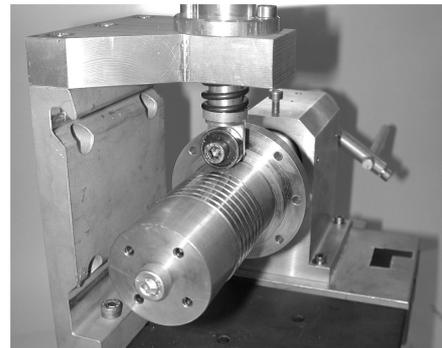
Mechanical tool used in BEAM (COBALT for Controlled Bending Application Loading Table).
